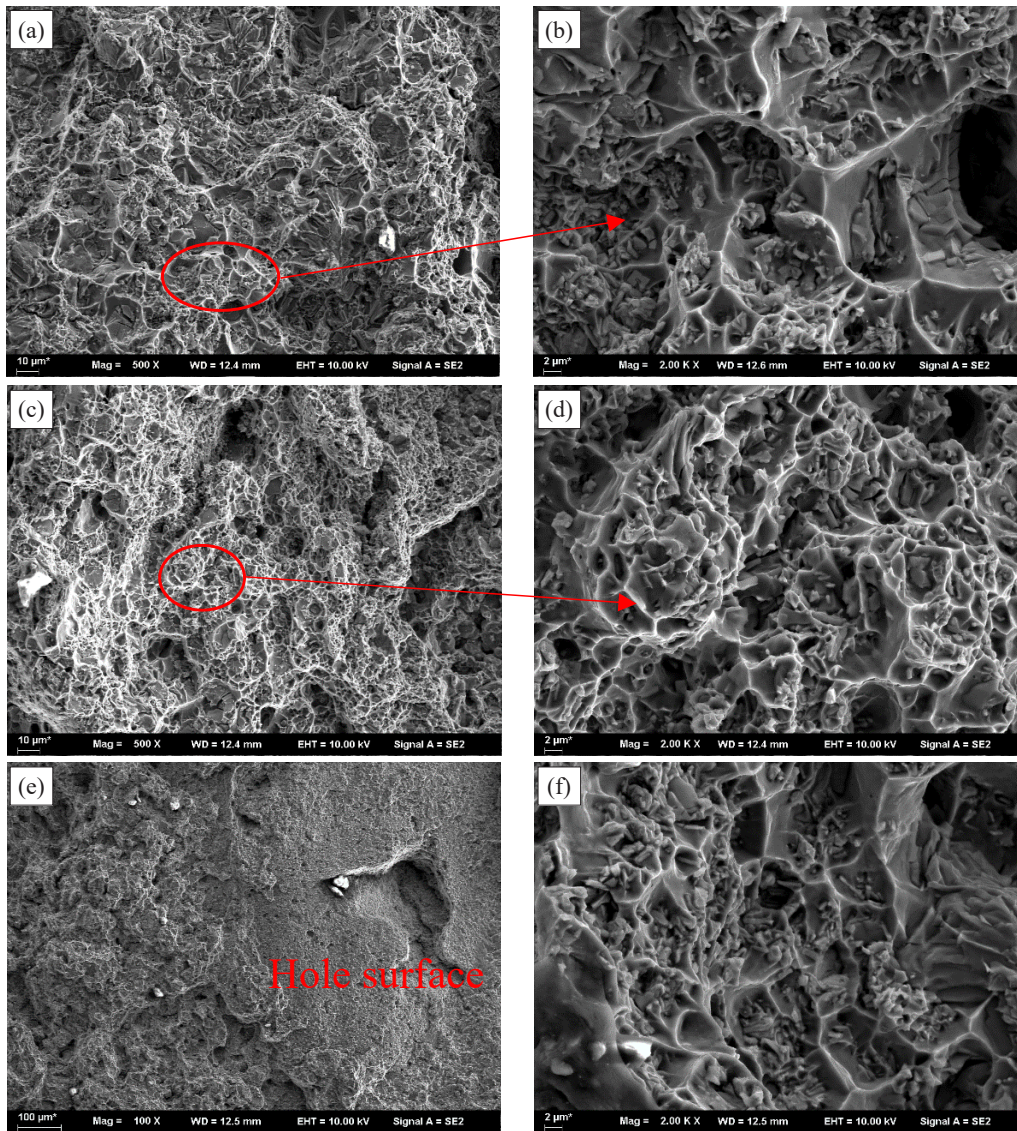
Tensile fracture morphology of FSW joints with different welding parameters. (a-b) 14000 r/min, 30 mm/min; (c-d) 14000 r/min, 50 mm/min; (e-f) 14000 r/min, 70 mm/min
